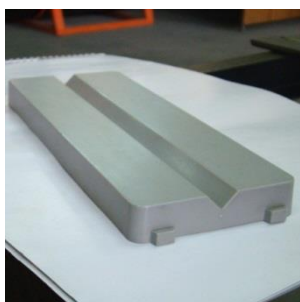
Sample of the single V butt weld model on the Fronius VWTS
